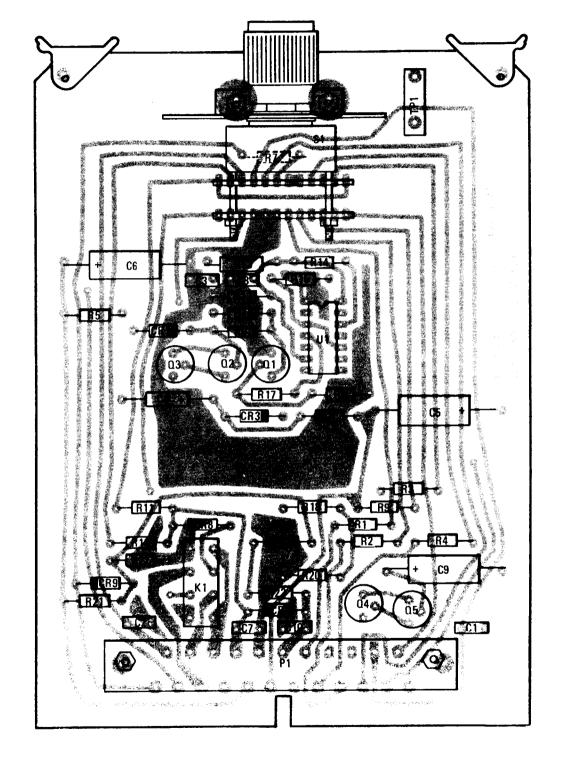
Meter Board PWB Assembly 1A1, PN 755017A4210 (Sheet 1 of 2)
